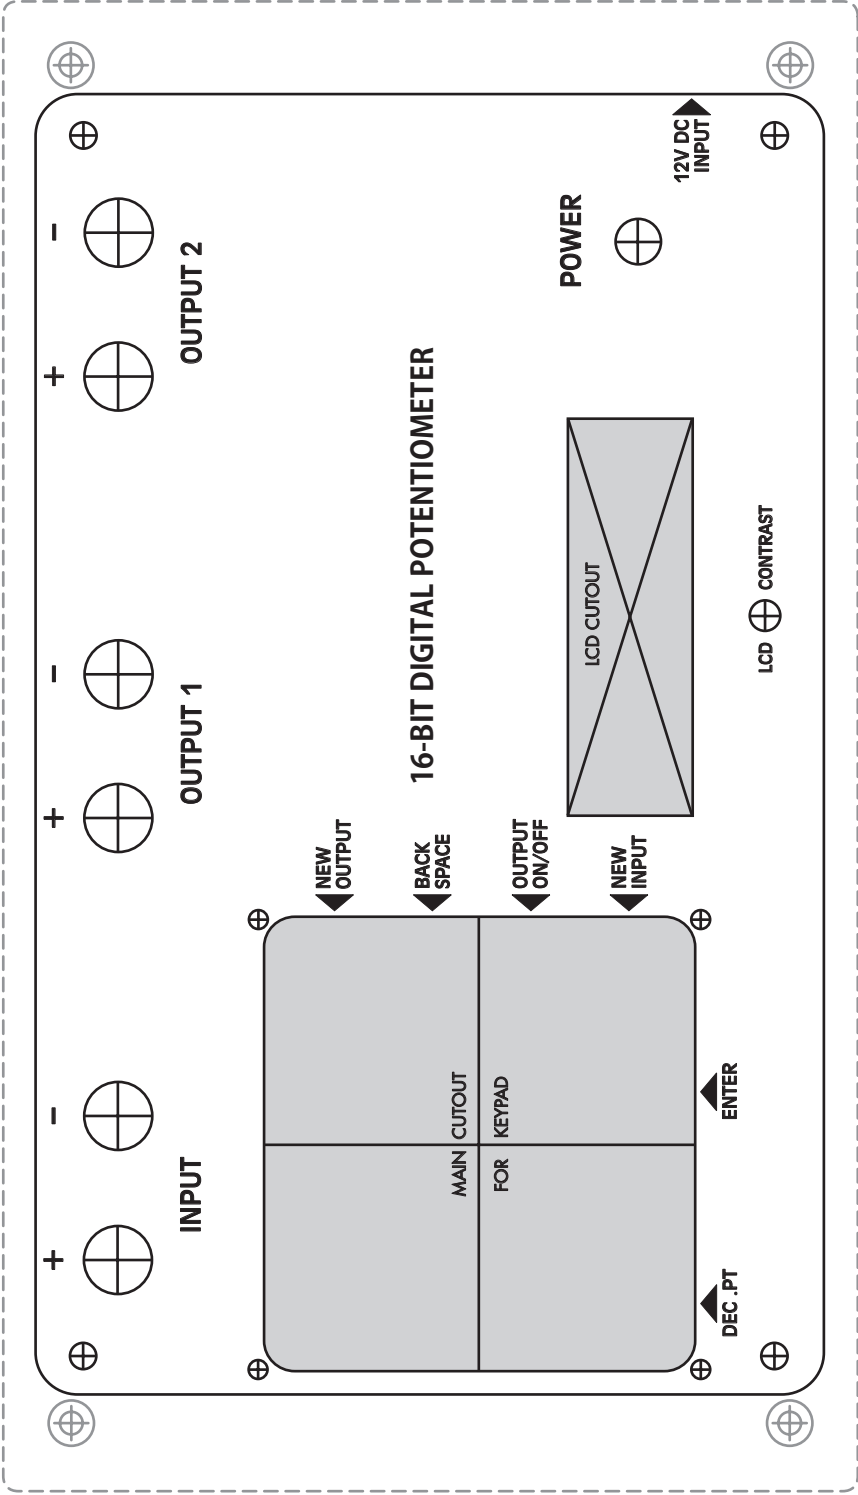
this full-size front panel artwork can be copied, laminated and attached to the case lid using double-sided adhesive tape.
